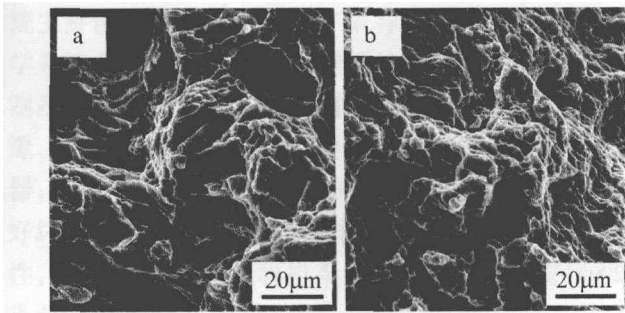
Scanning electronic microscope photos of joint fracture surfaces of repair weld
